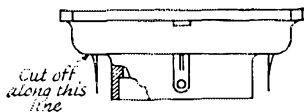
Sketch showing how the lower portion of the tube socket is cut off.
